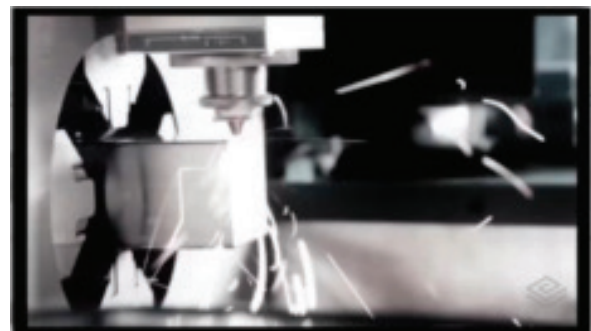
CNC automated Laser-cutting of chassis tubulars
